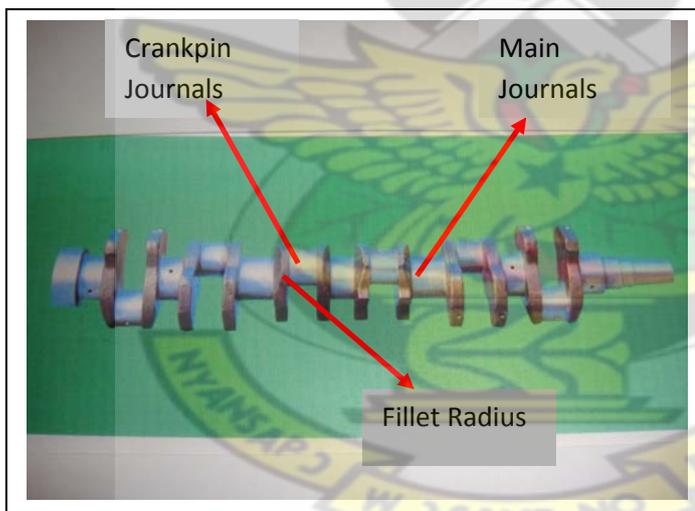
Crankshaft indicating specific inspection points for re-usage
